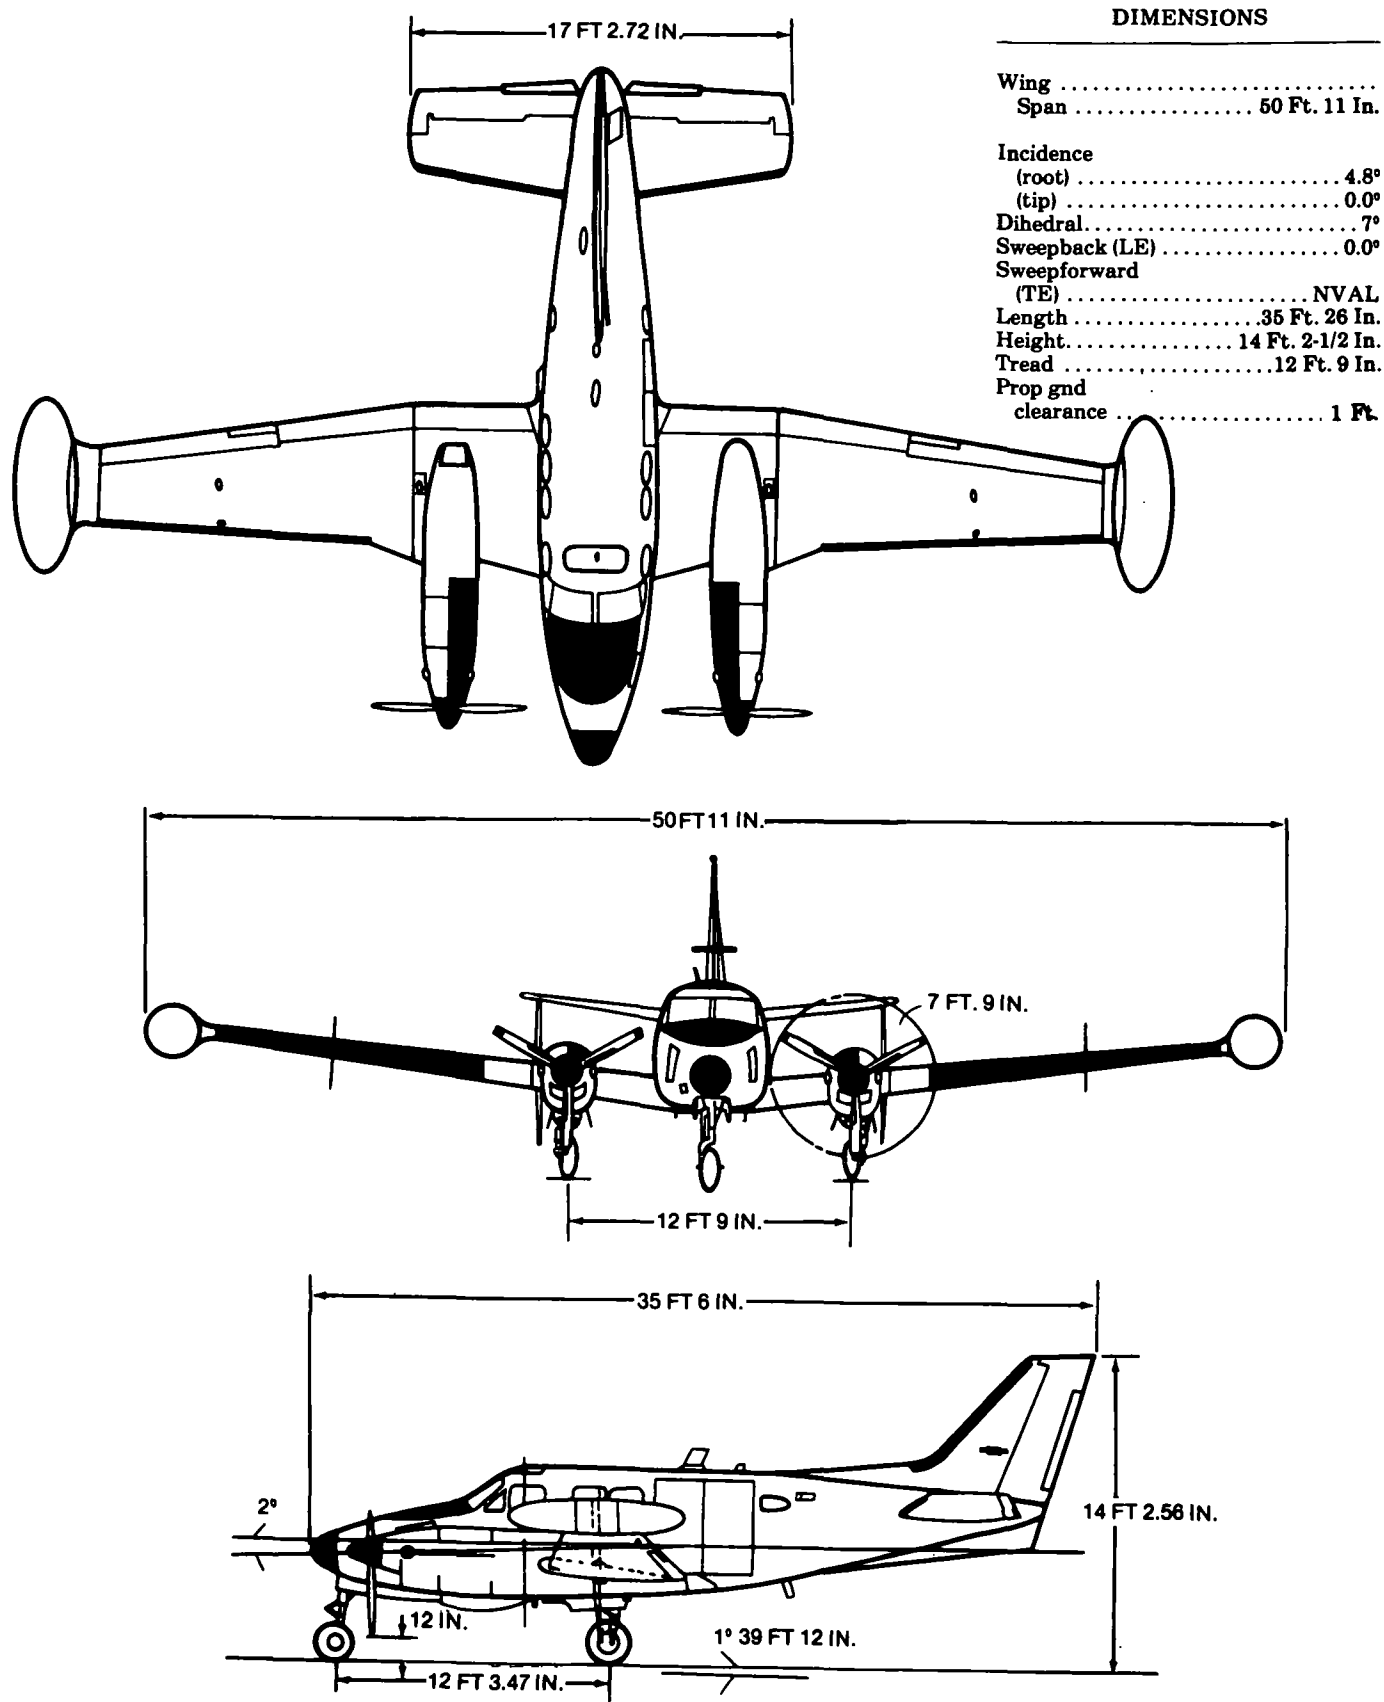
Principal Dimensions, RU-21H (Guardrail V)
